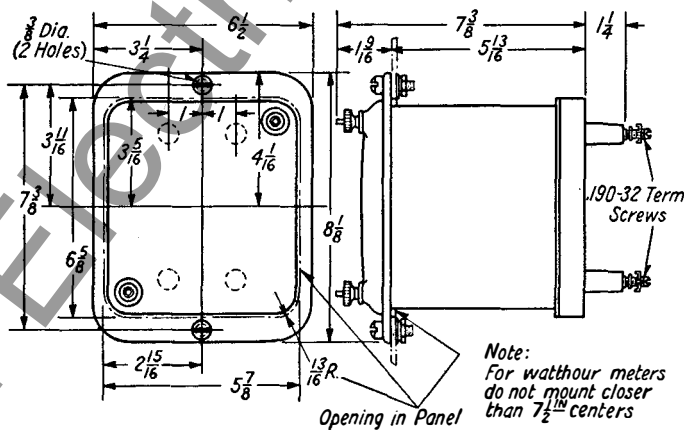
OUTLINE AND DRILLING PLAN FOR THE STANDARD
